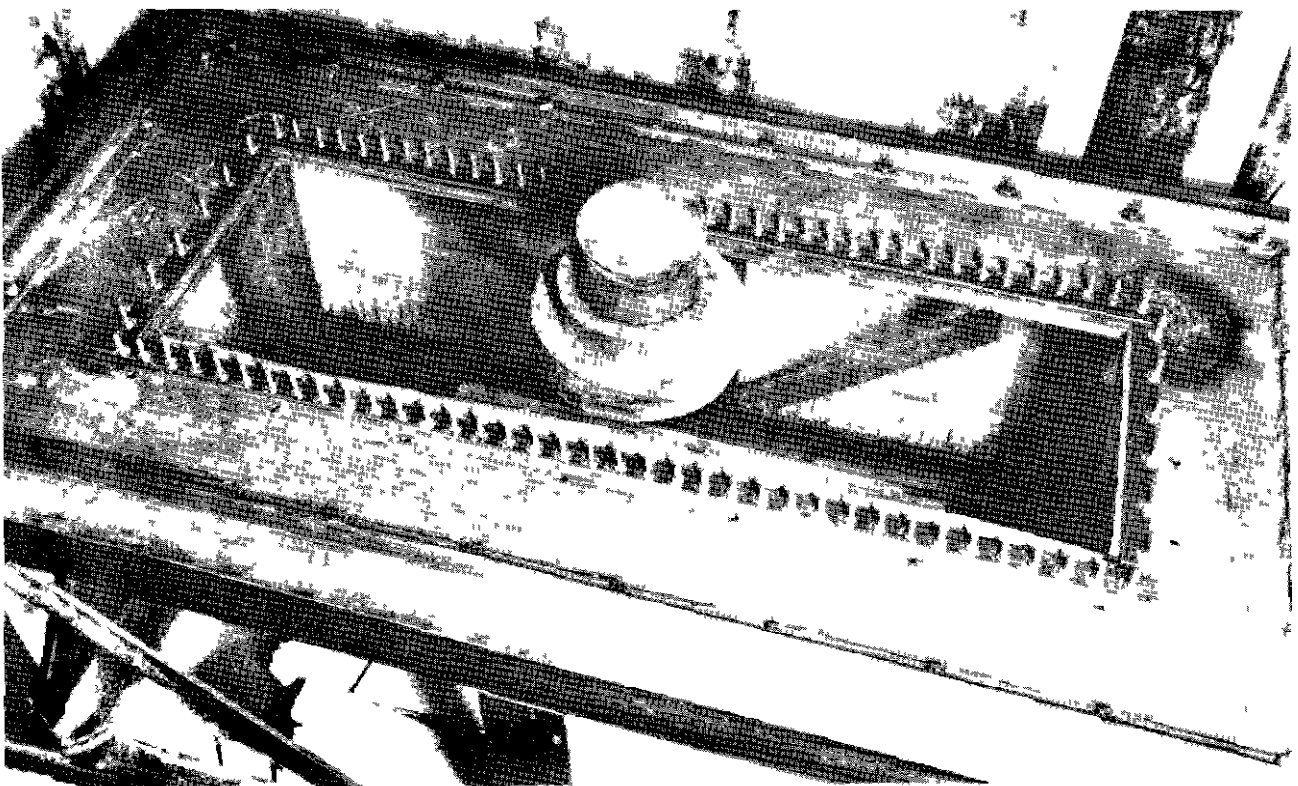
Windshield Mounting Structure and Butyl Rubber Cushion
